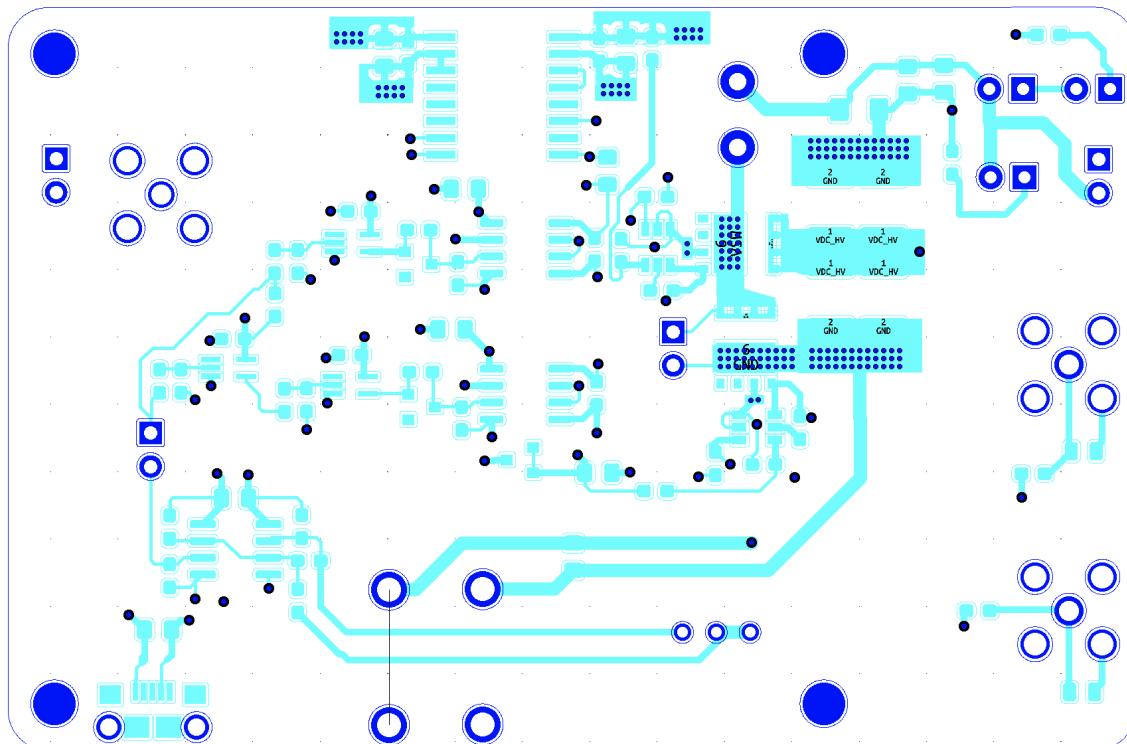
EVB-IZL10T1A- - TOP layer layout view
